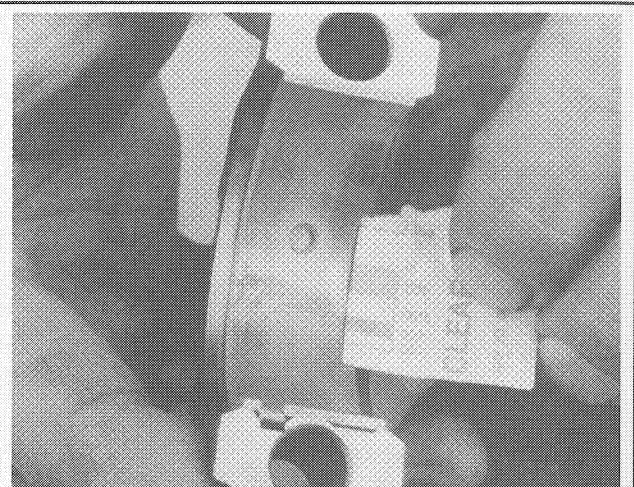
After the cap is removed again, use the scale supplied with the gauging material to check the clearance
